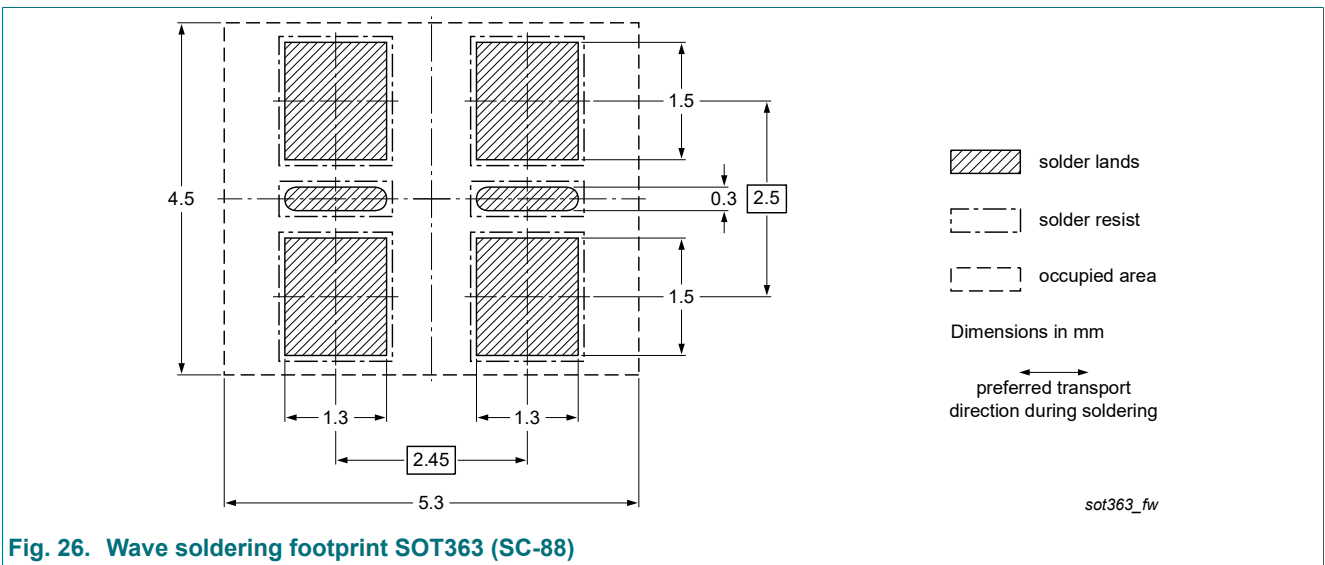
Wave soldering footprint SOT363 (SC-88)
